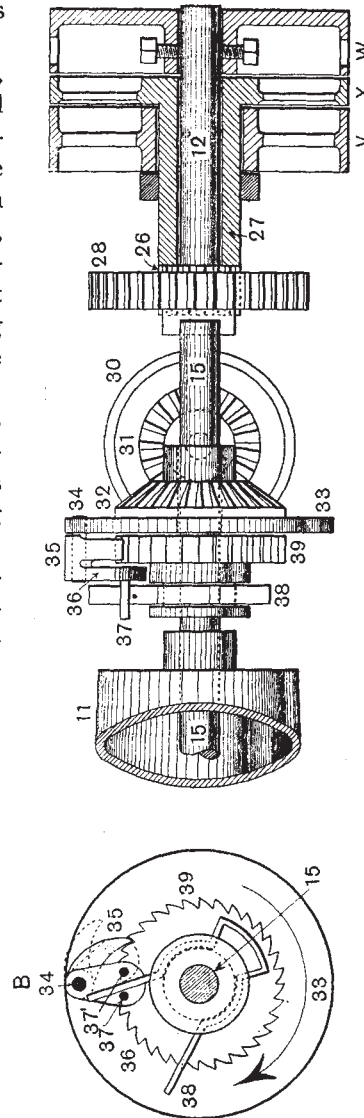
"LANCASTER" SLOW-MOTION DRIVING GEAR.
